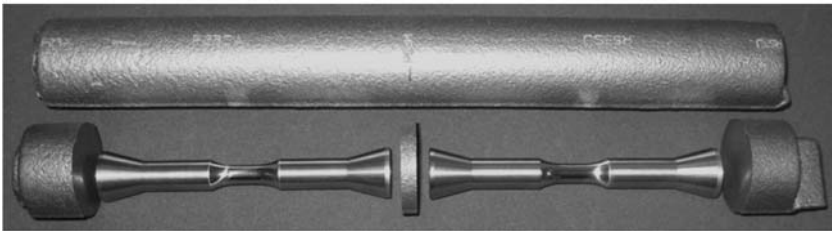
EN-GJS-600 bar provided by Daimler AG and machined fatigue specimens
